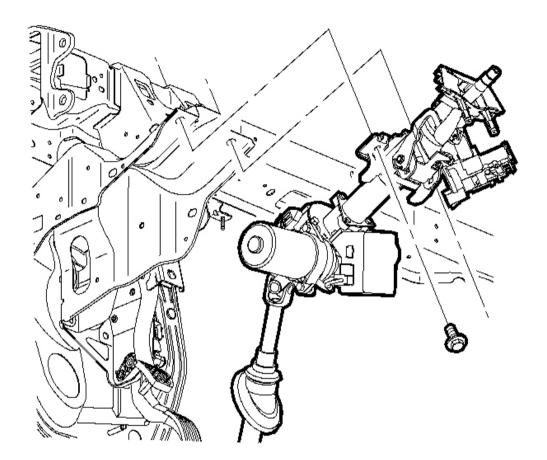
Upper Column & Attachment Bolts Courtesy of GENERAL MOTORS CORP.
